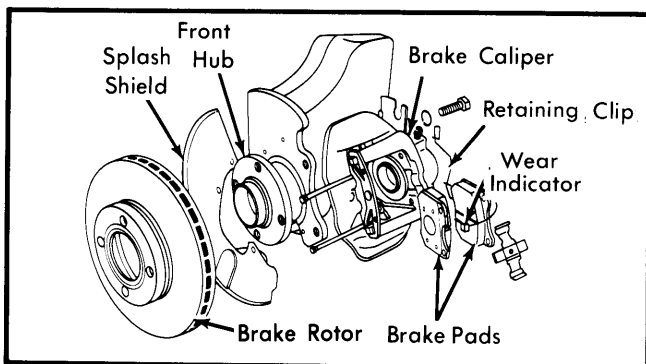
Exploded View of Audi 5000 Front Disc Brake Assembly
